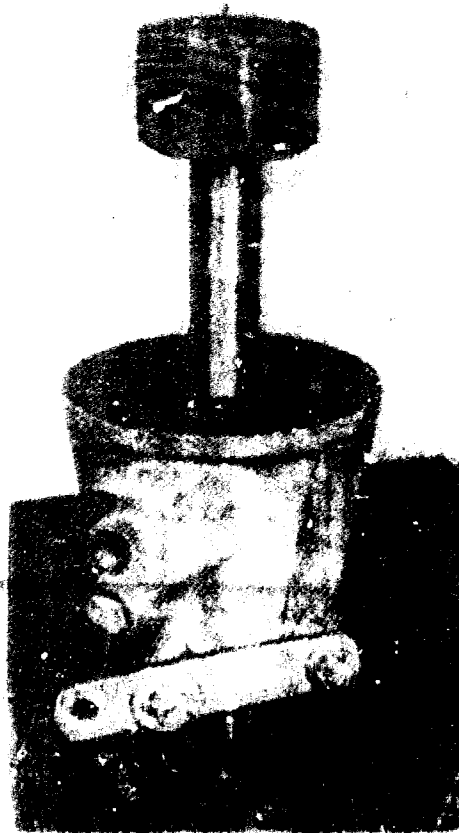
Pressing the front axle output shaft bearings from their carrier
